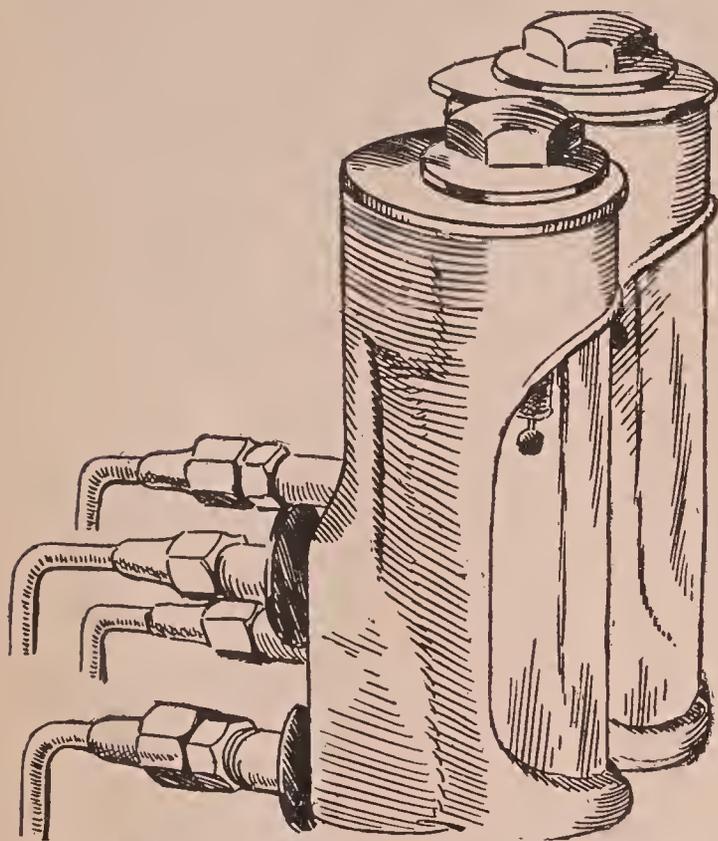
Lubricator telltale located on the dashboard in front of the driver, which serves to show him how the engine is being lubricated. This is very important and should not be neglected.
